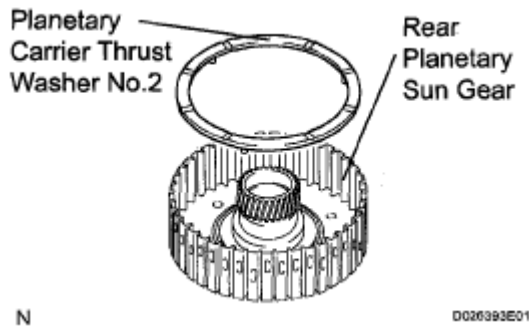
Identifying Planetary Carrier Thrust Washer And Rear Planetary Sun Gear Assembly
